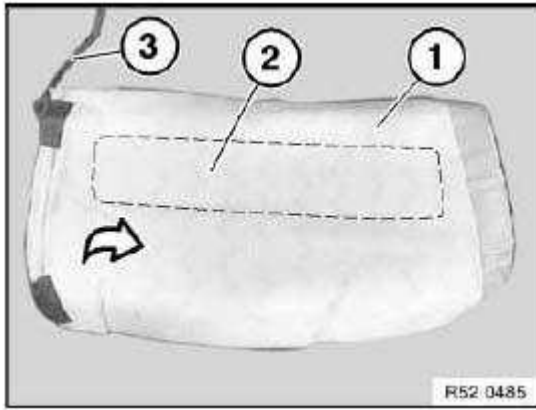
Removing Mat From Adhesive Tape Of Thigh Support
